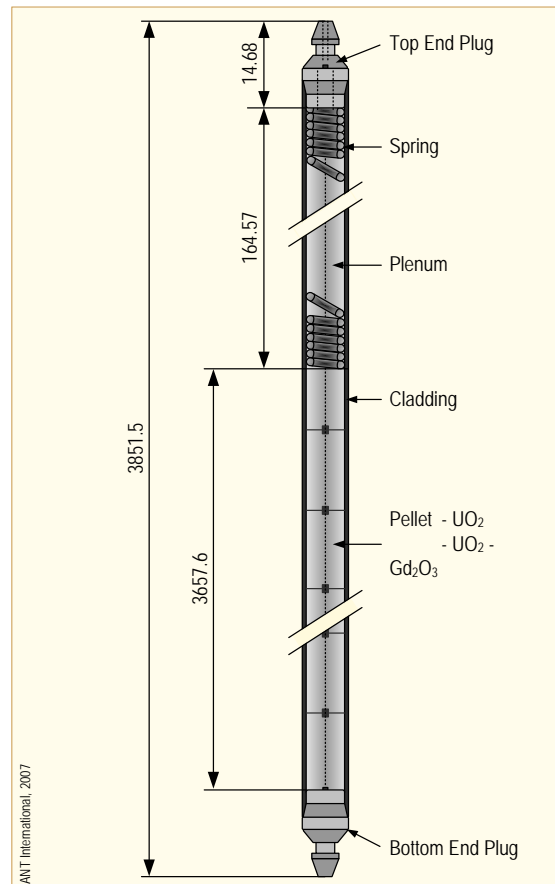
Typical PWR Fuel Rod. (Dimensions in mm for AFA 2G Rod of Framatome).
